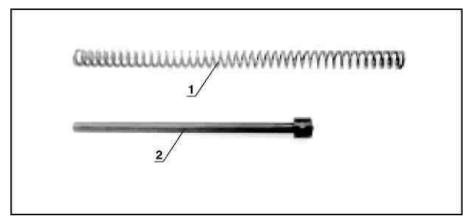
Recoil spring assembly: 1 – recoil spring; 2 – recoil spring guide bar
